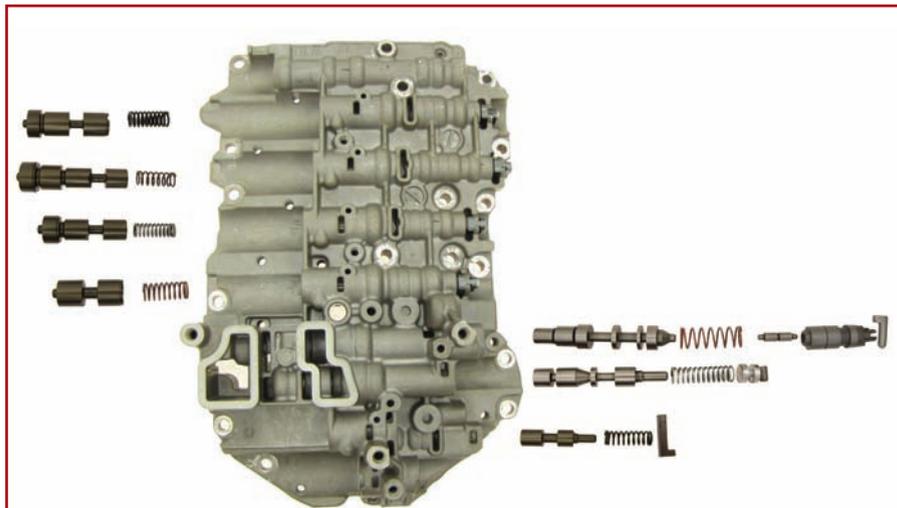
Removing every valve from the valve body will make the valve body easier to inspect.
